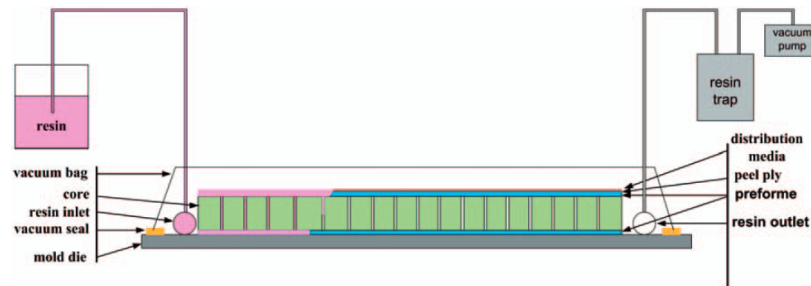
Schematic view of VARTM process (vacuum assisted resin transfer molding) [60]
